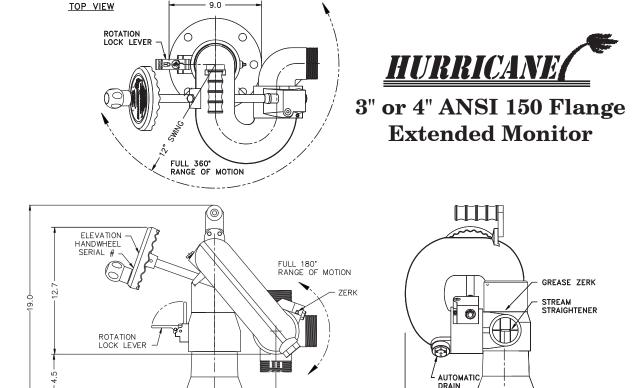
D Hurricane Fixed Extended Monitor Overall Dimensions w/3" or 4" ANSI 150 Flange
